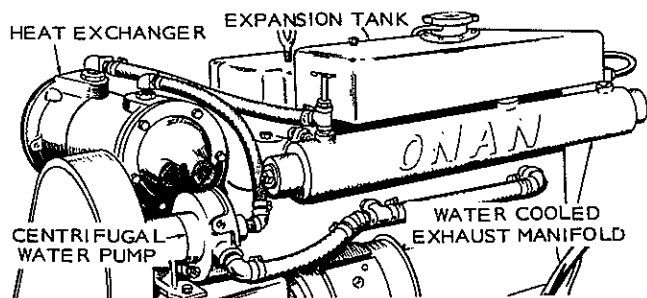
WATER COOLED EXHAUST MANIFOLD
